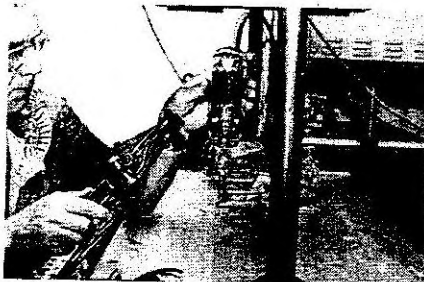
Attaching tube to the vacuum manifold with hand torch.
